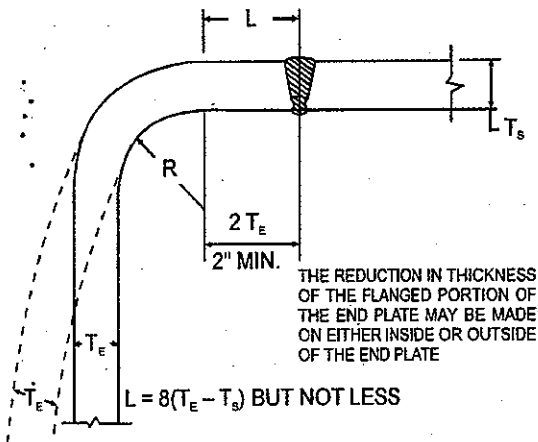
FLANGED END PLATES ENDS THICKER THAN SHELL
